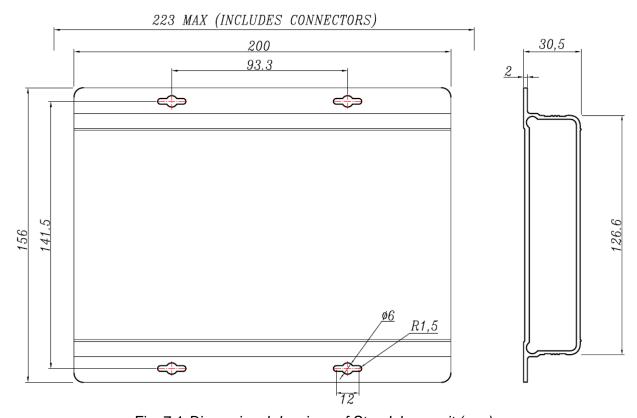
Dimensional drawings of Standalone unit (mm)
